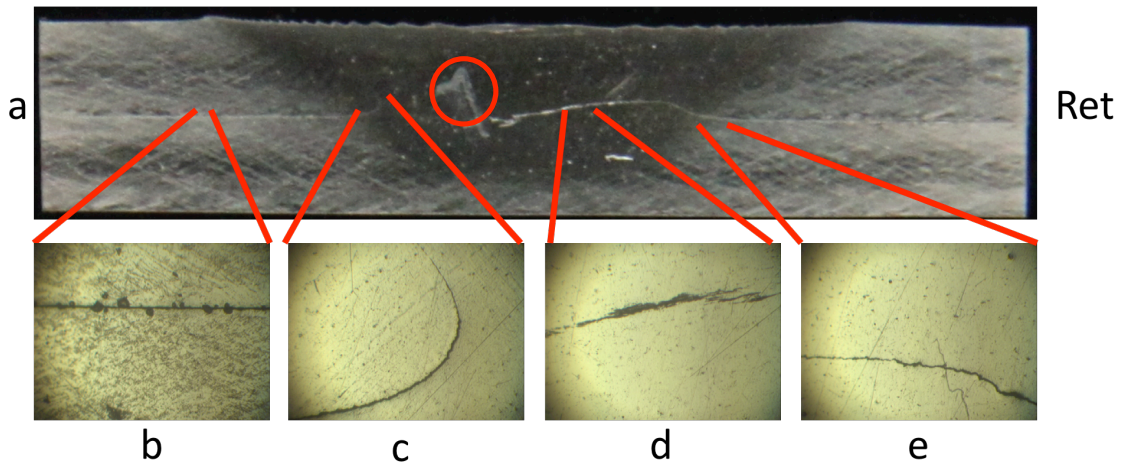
Weld 11: 21 ipm 1500 rpm 52% parent UTS, a) 1x image of weld zone b) 10x view of gap between parent plates (unwelded) c) 10x view of hooking defect on advancing side d) 10x view of joint line remnant within weld zone, e) 10x view of the interface between the weld zone joint line remnant and the gap between the parent plates
